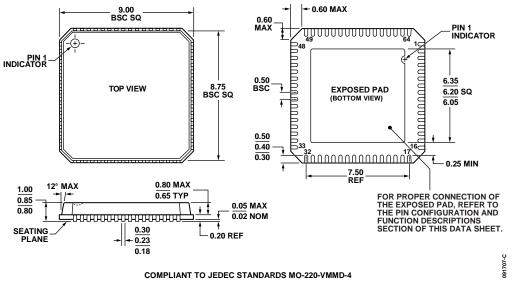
64-Lead Lead Frame Chip Scale Package [LFCSP_VQ] 9 mm × 9 mm Body, Very Thin Quad (CP-64-4) Dimensions shown in millimeters
